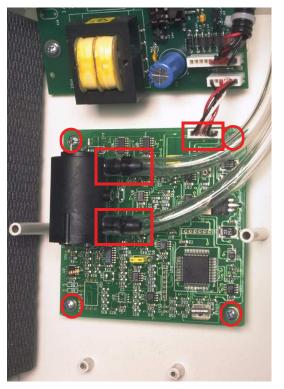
FIGURE S: CONNECTIONS AND SCREW LOCATIONS ON OPI BOARD
